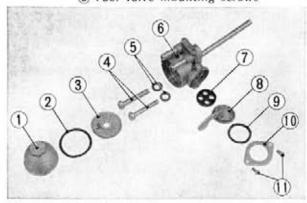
① Fuel strainer cup ② O ring ③ Fuel strainer screen ④ 6mm cross screws ⑤ Fuel cock fixing packing ⑥ Fuel valve body ⑦ Fuel cock valve packing ⑧ Fuel cock lever ⑨ Cock lever spring ⑩ Setting plate ⑪ Cross screws
